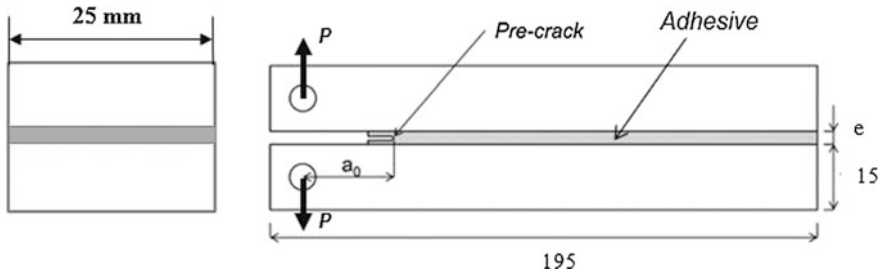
DCB specimen geometry (dimensions in mm), $e = 0.3, 0.5, 1$ and 2 mm
